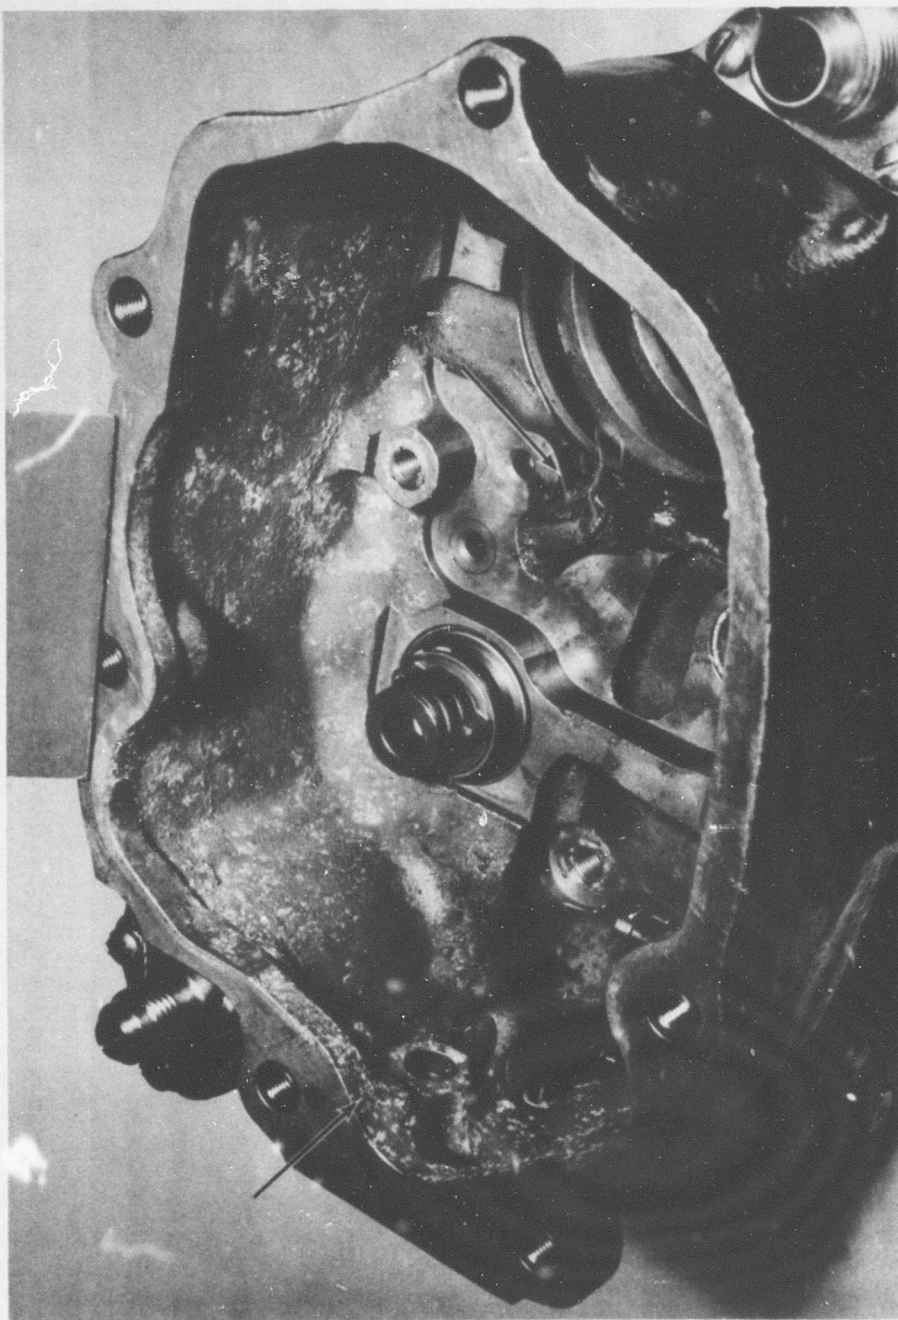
Fuel Control Housing. (Note rust deposits and corrosion of the anodized surfaces.)
